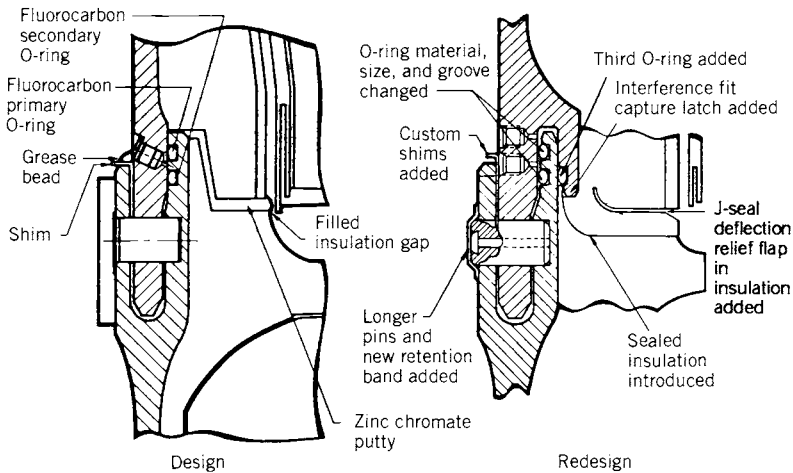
The joints between segments of the Shuttle solid rocket booster (SRB) were redesigned after a dramatic failure. The improvements were not only in a third O-ring, the mechanical joint, and its locking mechanism, but also featured a redesign of the insulation between propellant segments. (Courtesy of NASA.)
